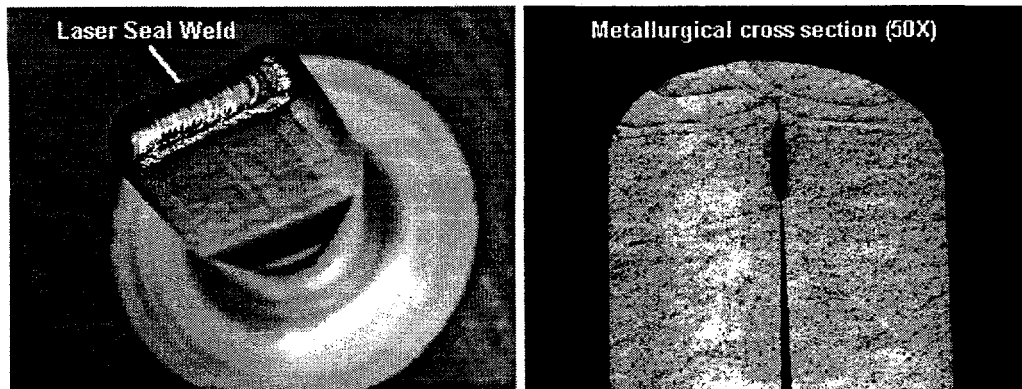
illustrates the pinch-off tooling. With the pinch-off tool in place, the purge tube is cut off flush with the upper surface of the pinch-off tool. The pinch-off tool and the completed assembly are placed in the laser work station. A laser seam weld is completed along the end of the pinched tube. The pinch-off tool is removed after the weld is completed. Although not incorporated in development parts, standard leak testing protocol suggests back filling the assembly with a slight over pressure of a tracer gas (e.g., helium) and performing a leak test on the purge tube seal weld also. See Figure 12 for an example of the purge tube seam weld and a metallurgical cross section of the weld.
